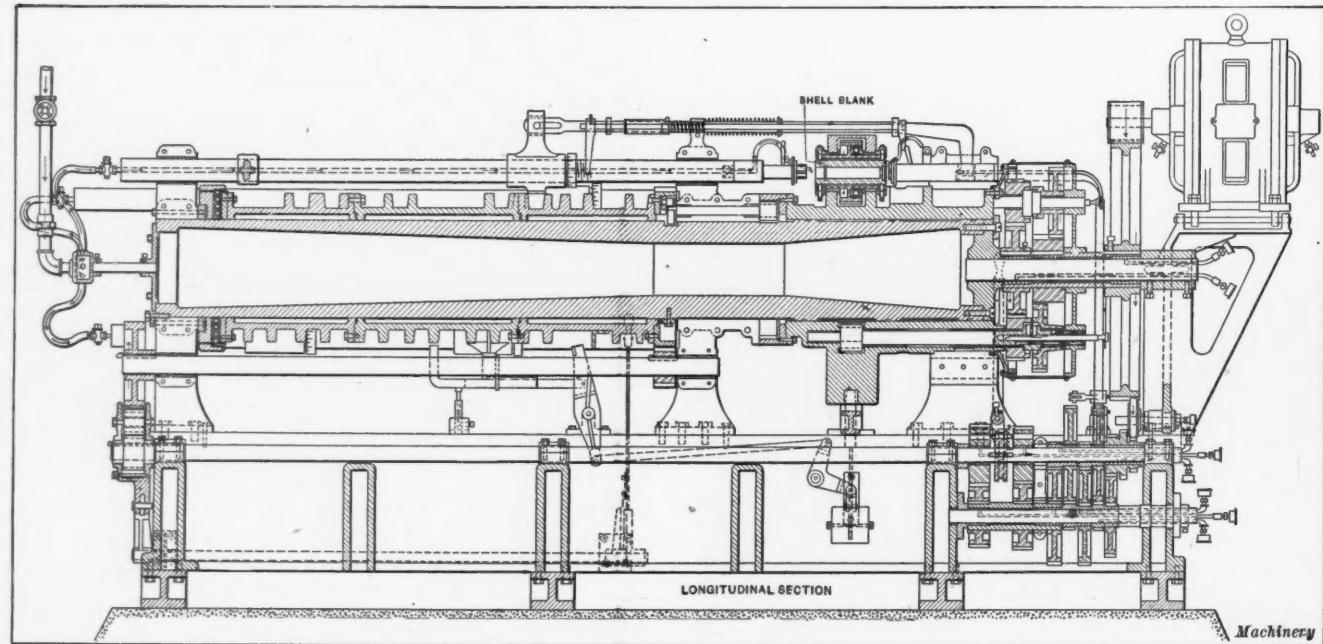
Longitudinal Section of Machine shown in Fig. 1, illustrating Method of driving, etc.
